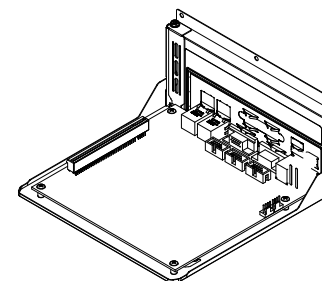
Motherboard and I/O Shield Installed in the Rear Tray
